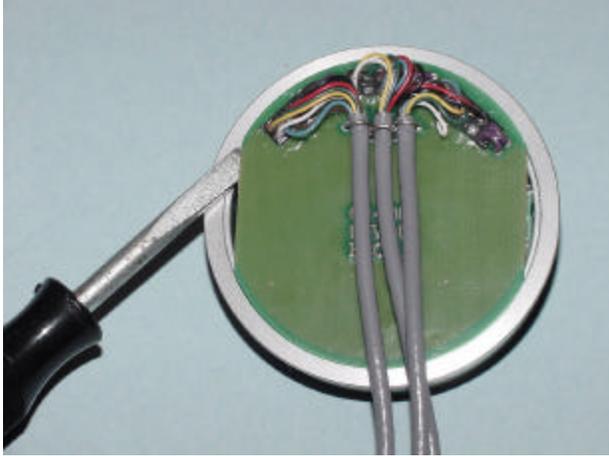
Carefully pry the Cover Board from the Input Board assembly. Pry first on one side and then on the other to avoid bending the connector pins.
